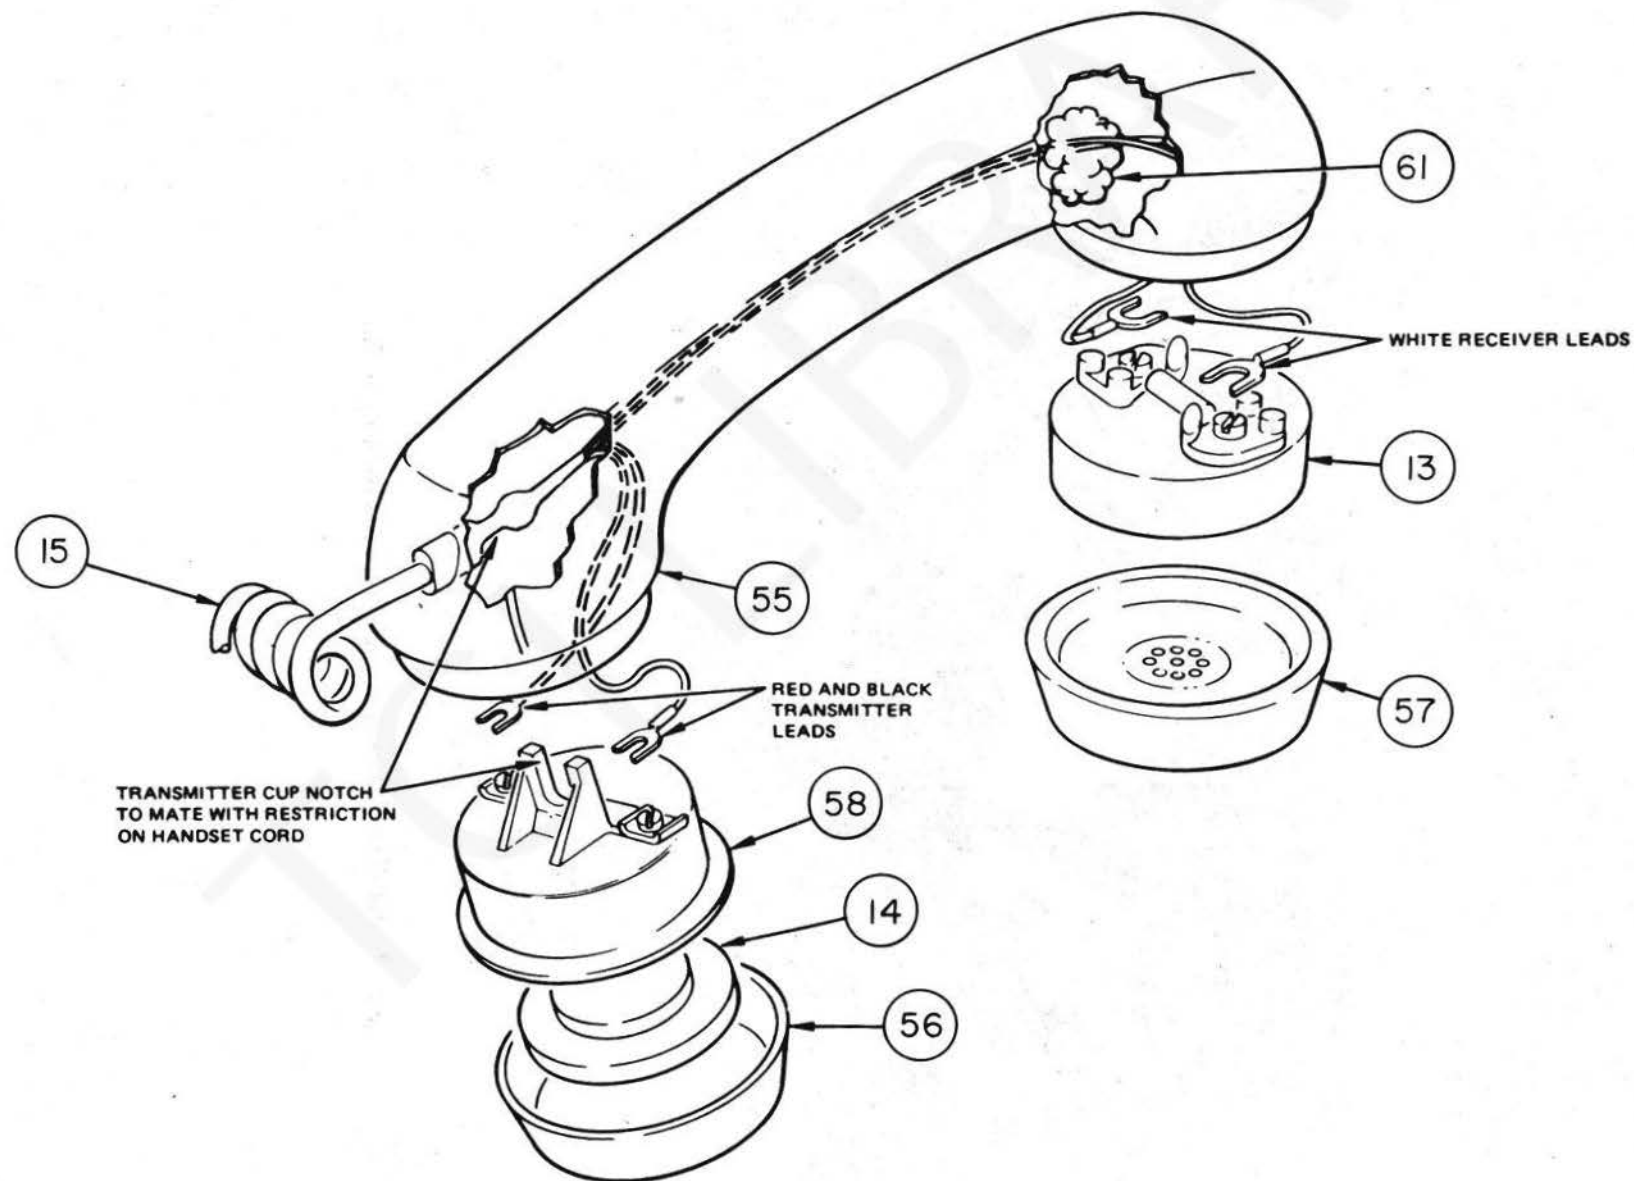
Type Mickey Mouse Phone Assembly of Handset
